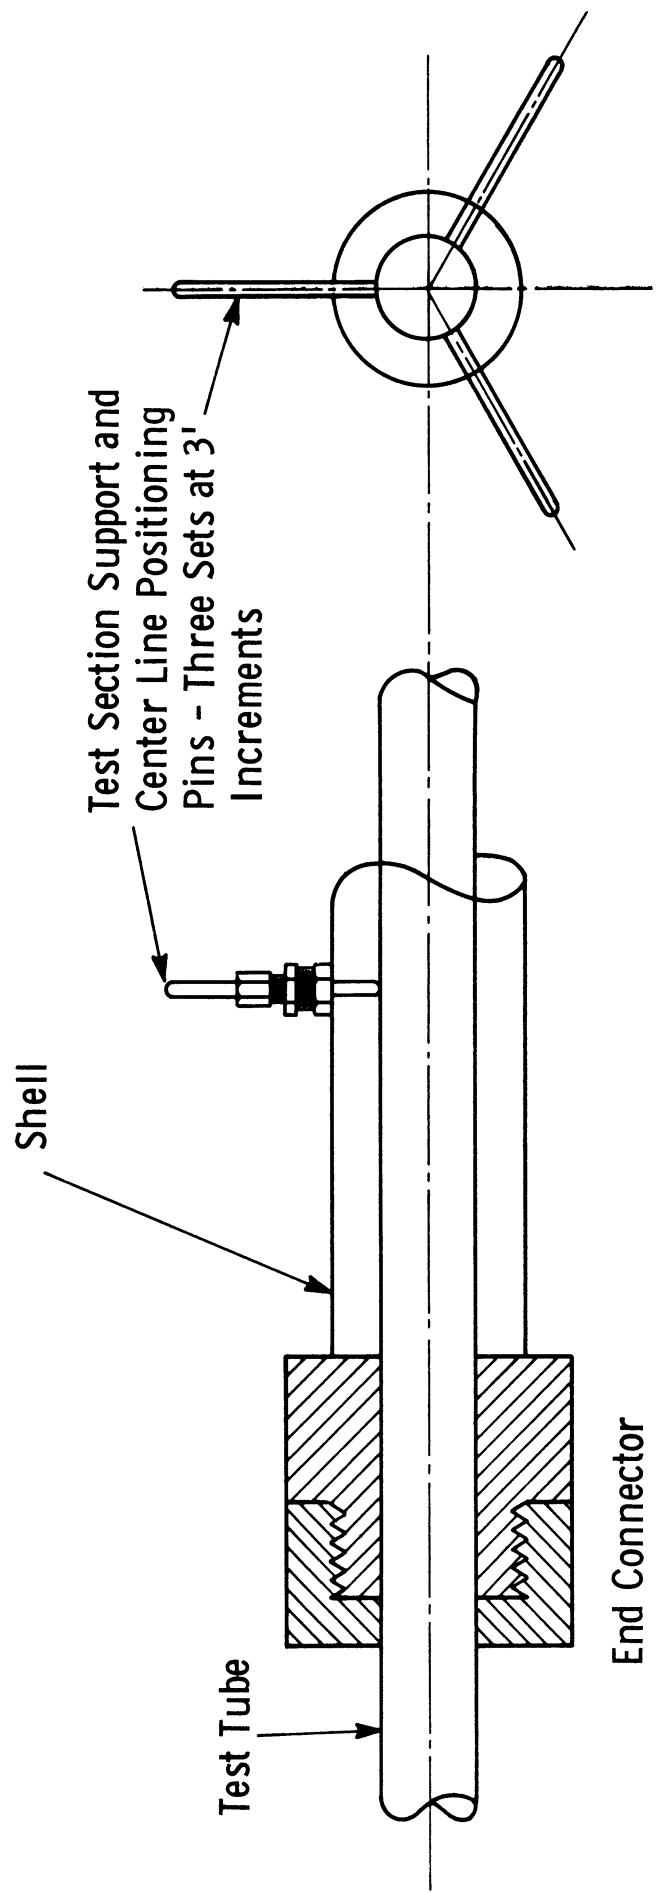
Cross-sectional Drawing of Concentric Tube and Shell Heat Exchanger End Fittings and Test Tube Supports.
